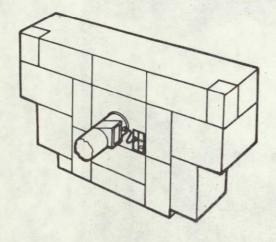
Side-mounted Interface Mechanism Engineering Test Unit
